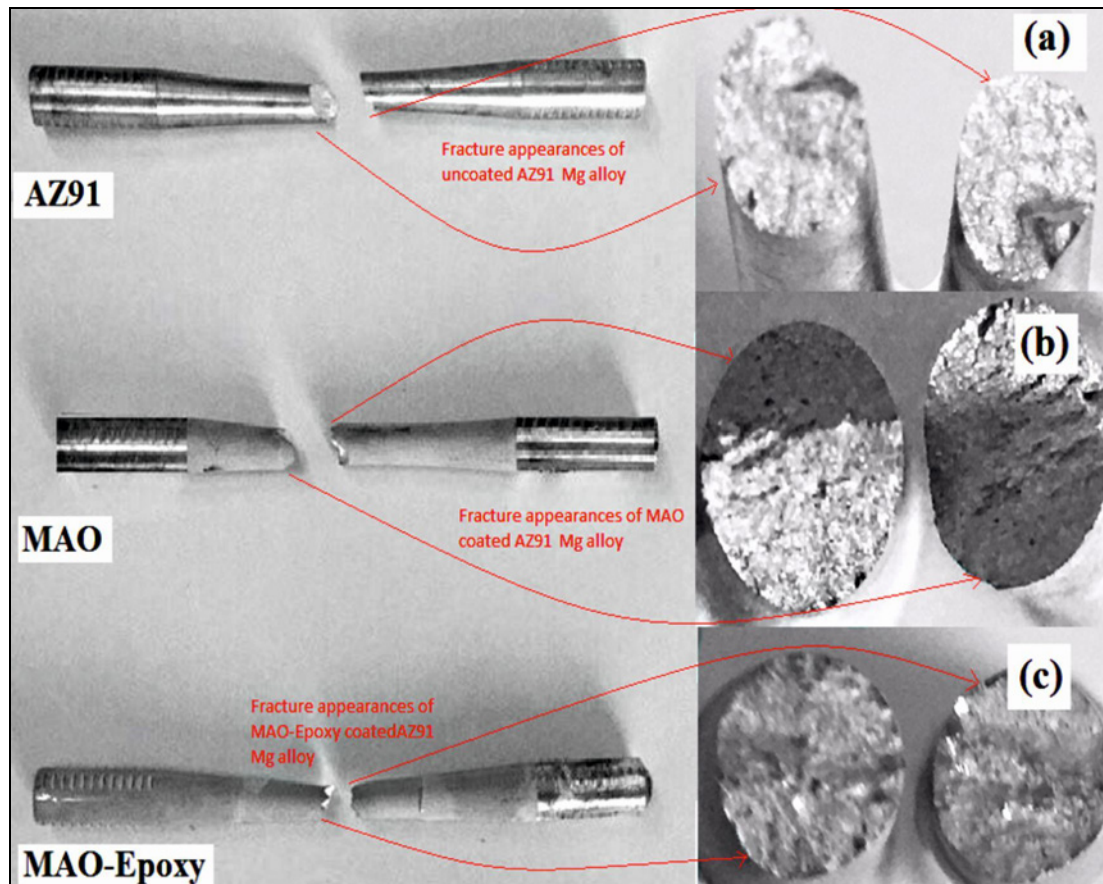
Tensile fracture views of AZ91, MAO and MAO-epoxy samples.
